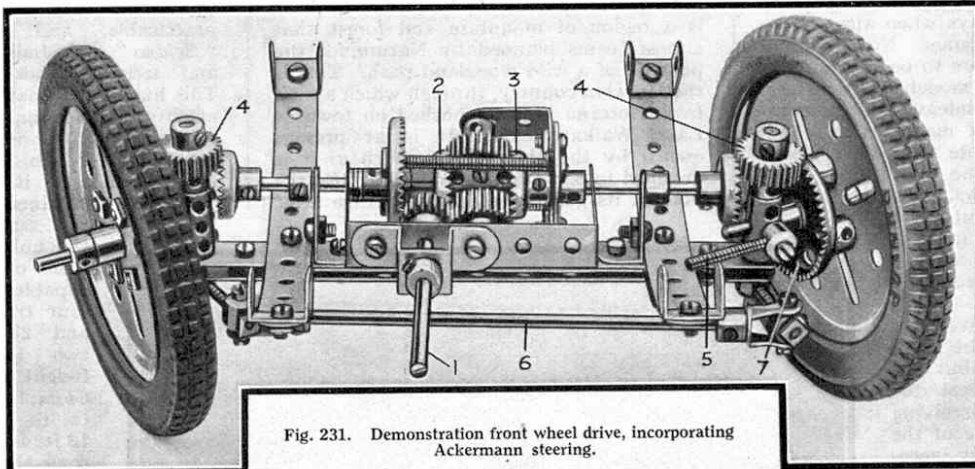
Demonstration front wheel drive, incorporating Ackermann steering.
